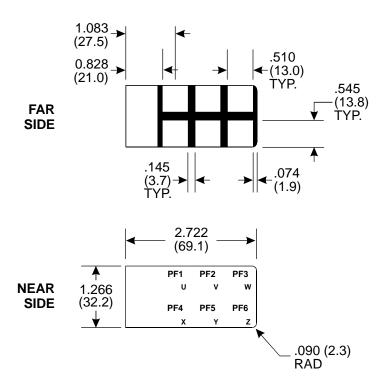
3410KP/3412KP Control Key Insert Dimensions
